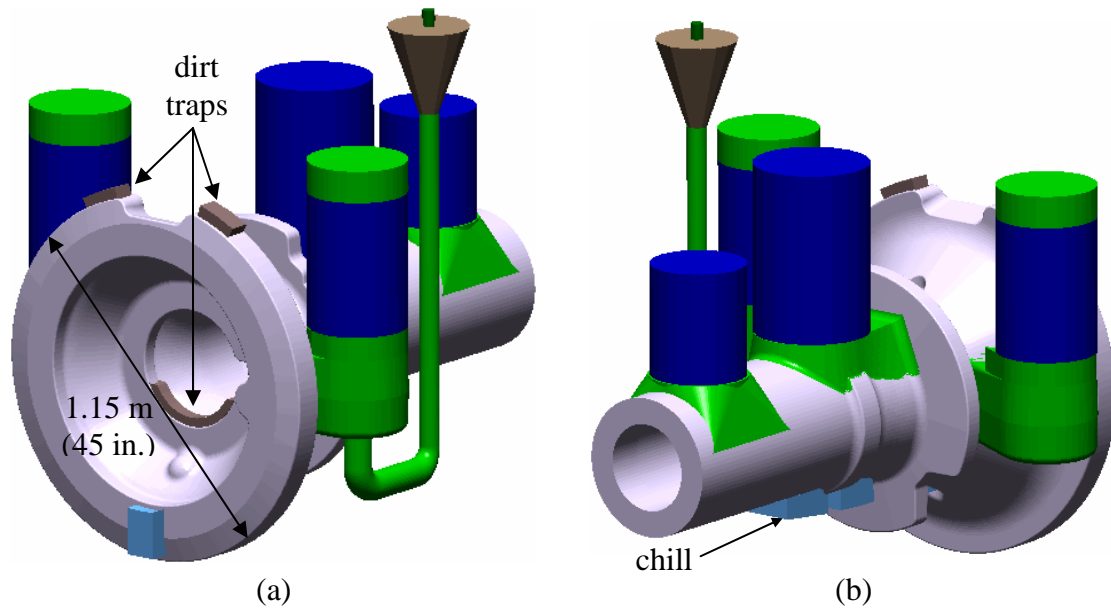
Two schematic views of rigging for spindle castings, showing risers and gating.
